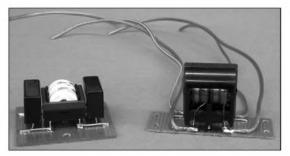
The AC line-filter assembly for the external supply is shown on the left. The raw- DC common-mode choke (assembled and installed in Part 2) is shown on the right. Components are soldered to Circuit Specialists RF Prototyping Board.
